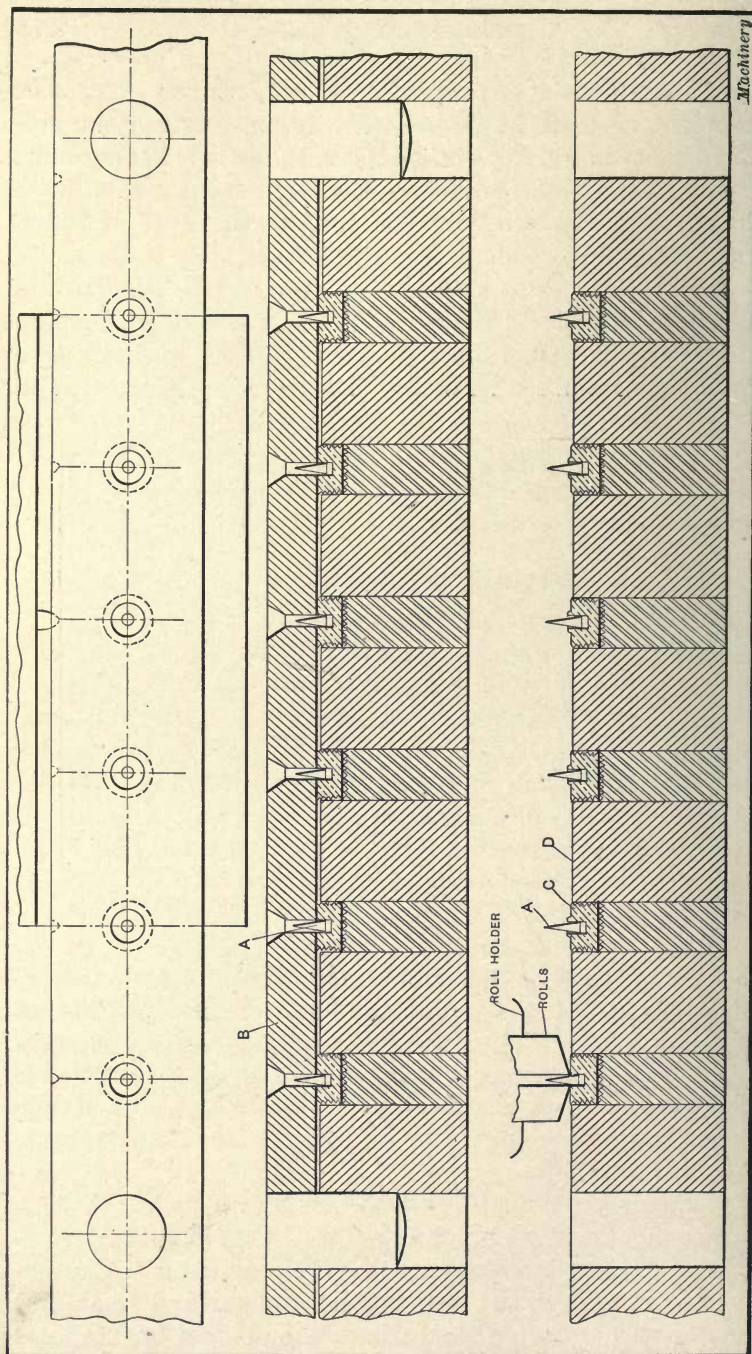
Diagram showing Construction of Fixture used in assembling Percussion Needle Plug
